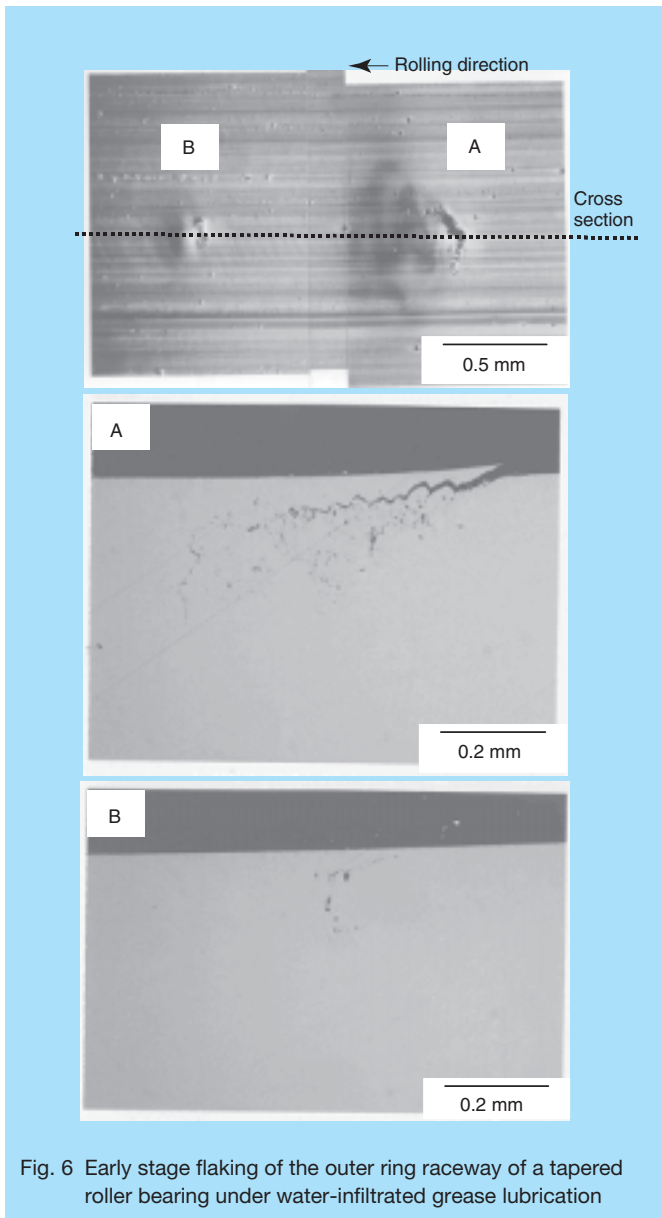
Early stage flaking of the outer ring raceway of a tapered roller bearing under water-infiltrated grease lubrication
